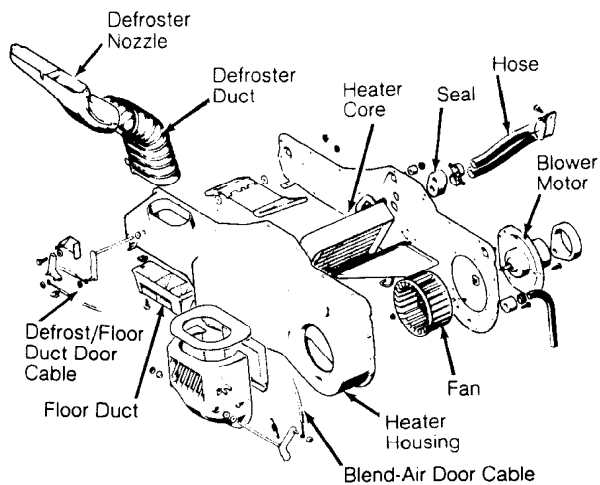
Exploded View Of Air Intake System (Wrangler)
